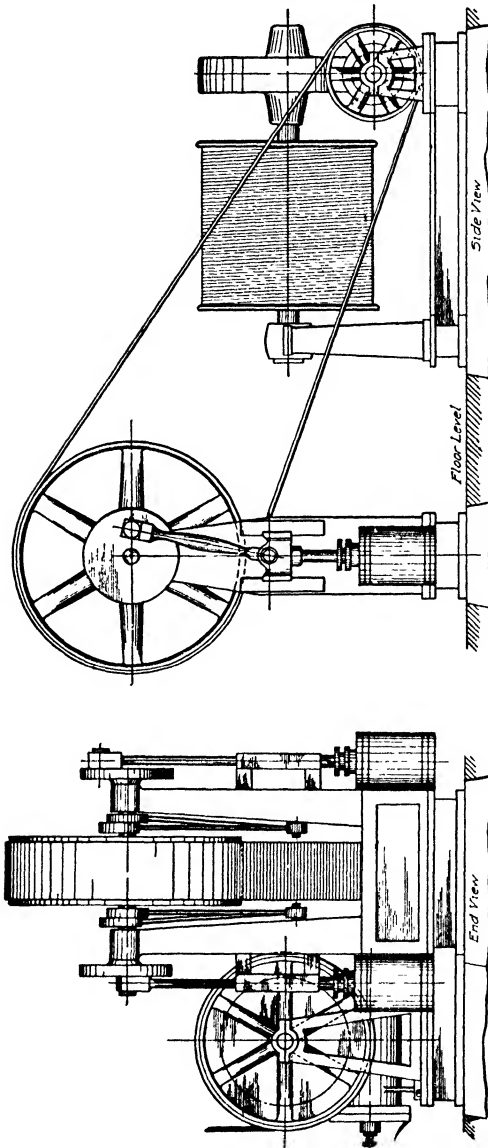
First Steam Elevator. Belt-Driven from Engine; Worm-Driven Winding Drum
